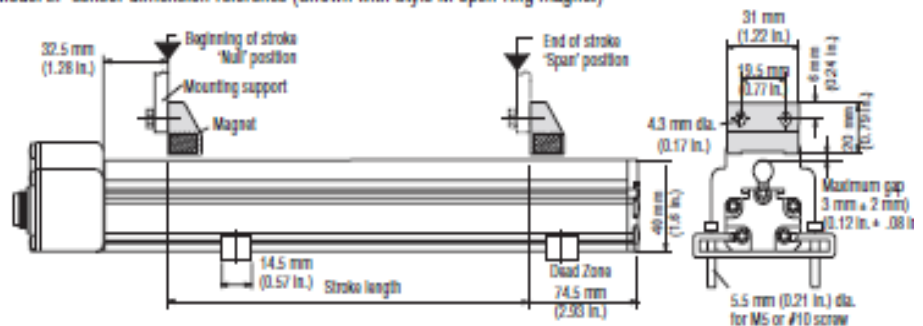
E-Series Model EP sensor dimension reference (Shown with Style L Block magnet)
